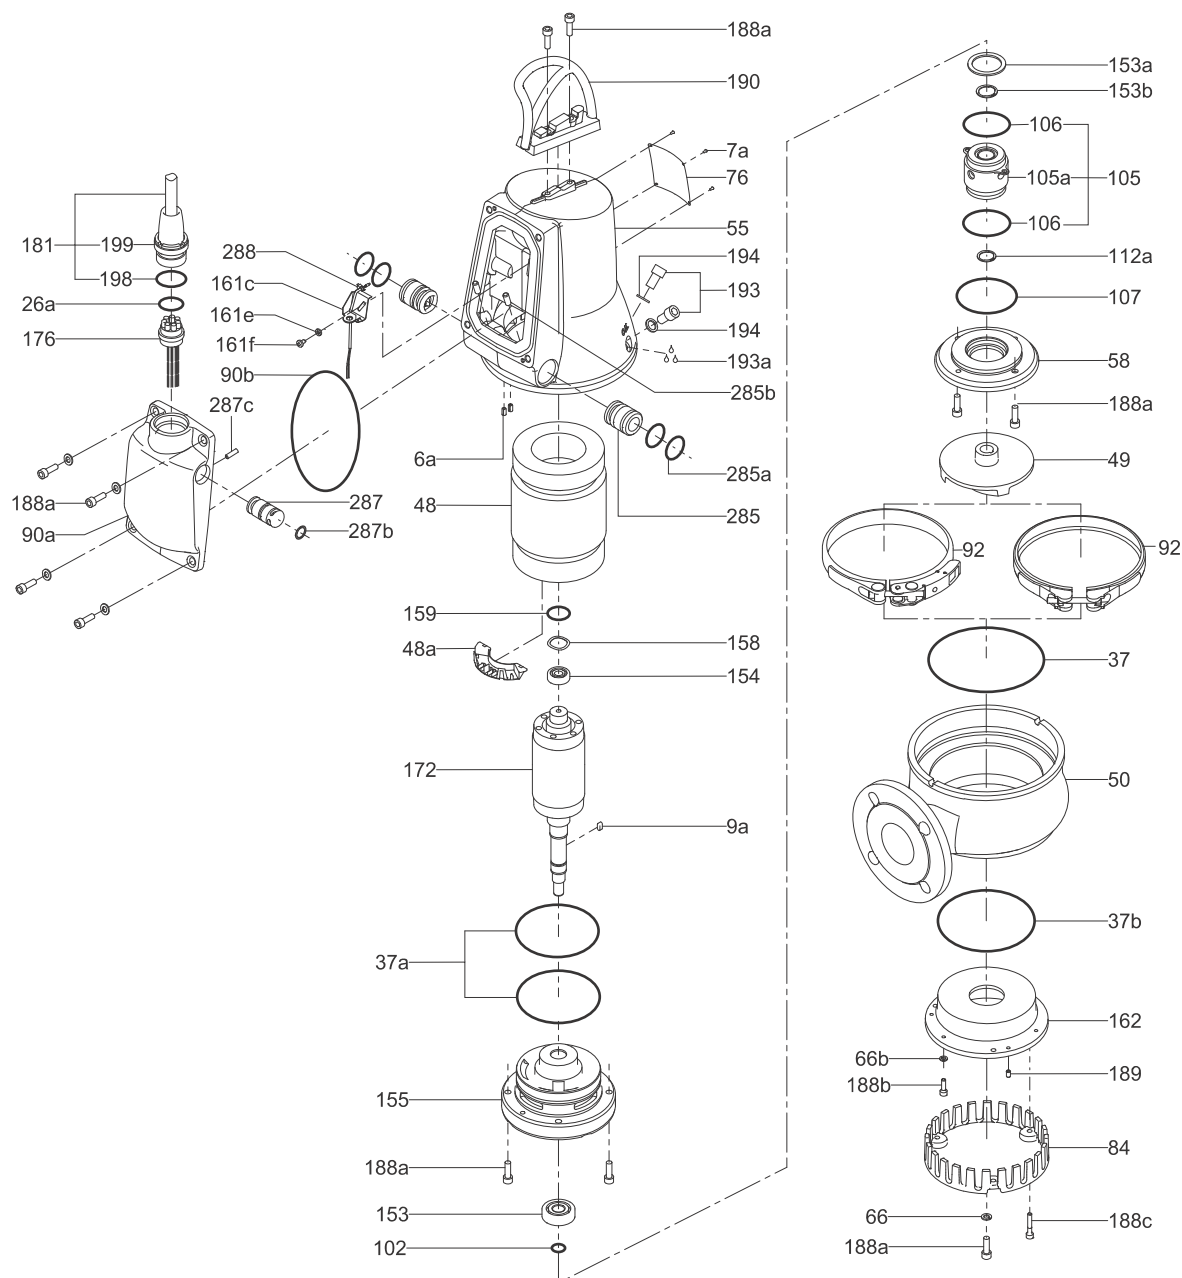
Exploded view, DP10.65.26 AUTO_{ADAPT}
